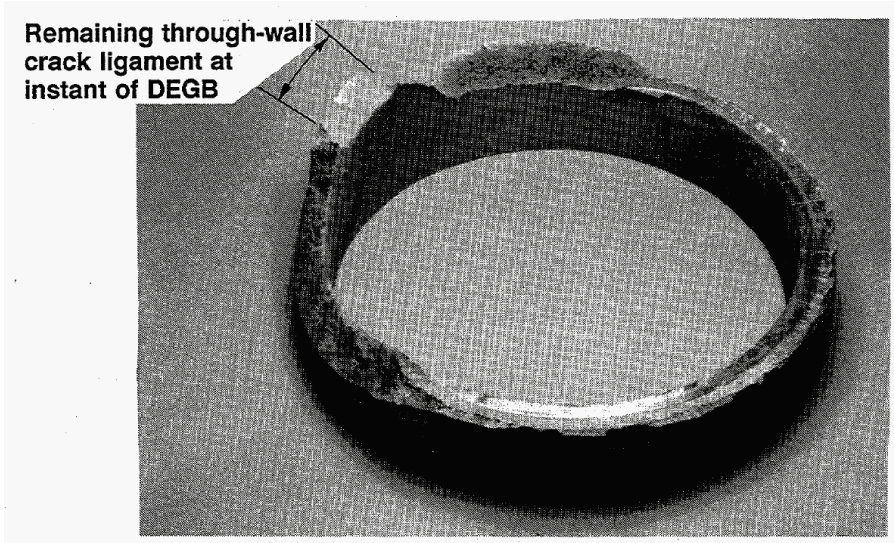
Photograph of the fracture surface from a double-edged guillotine break [2].
